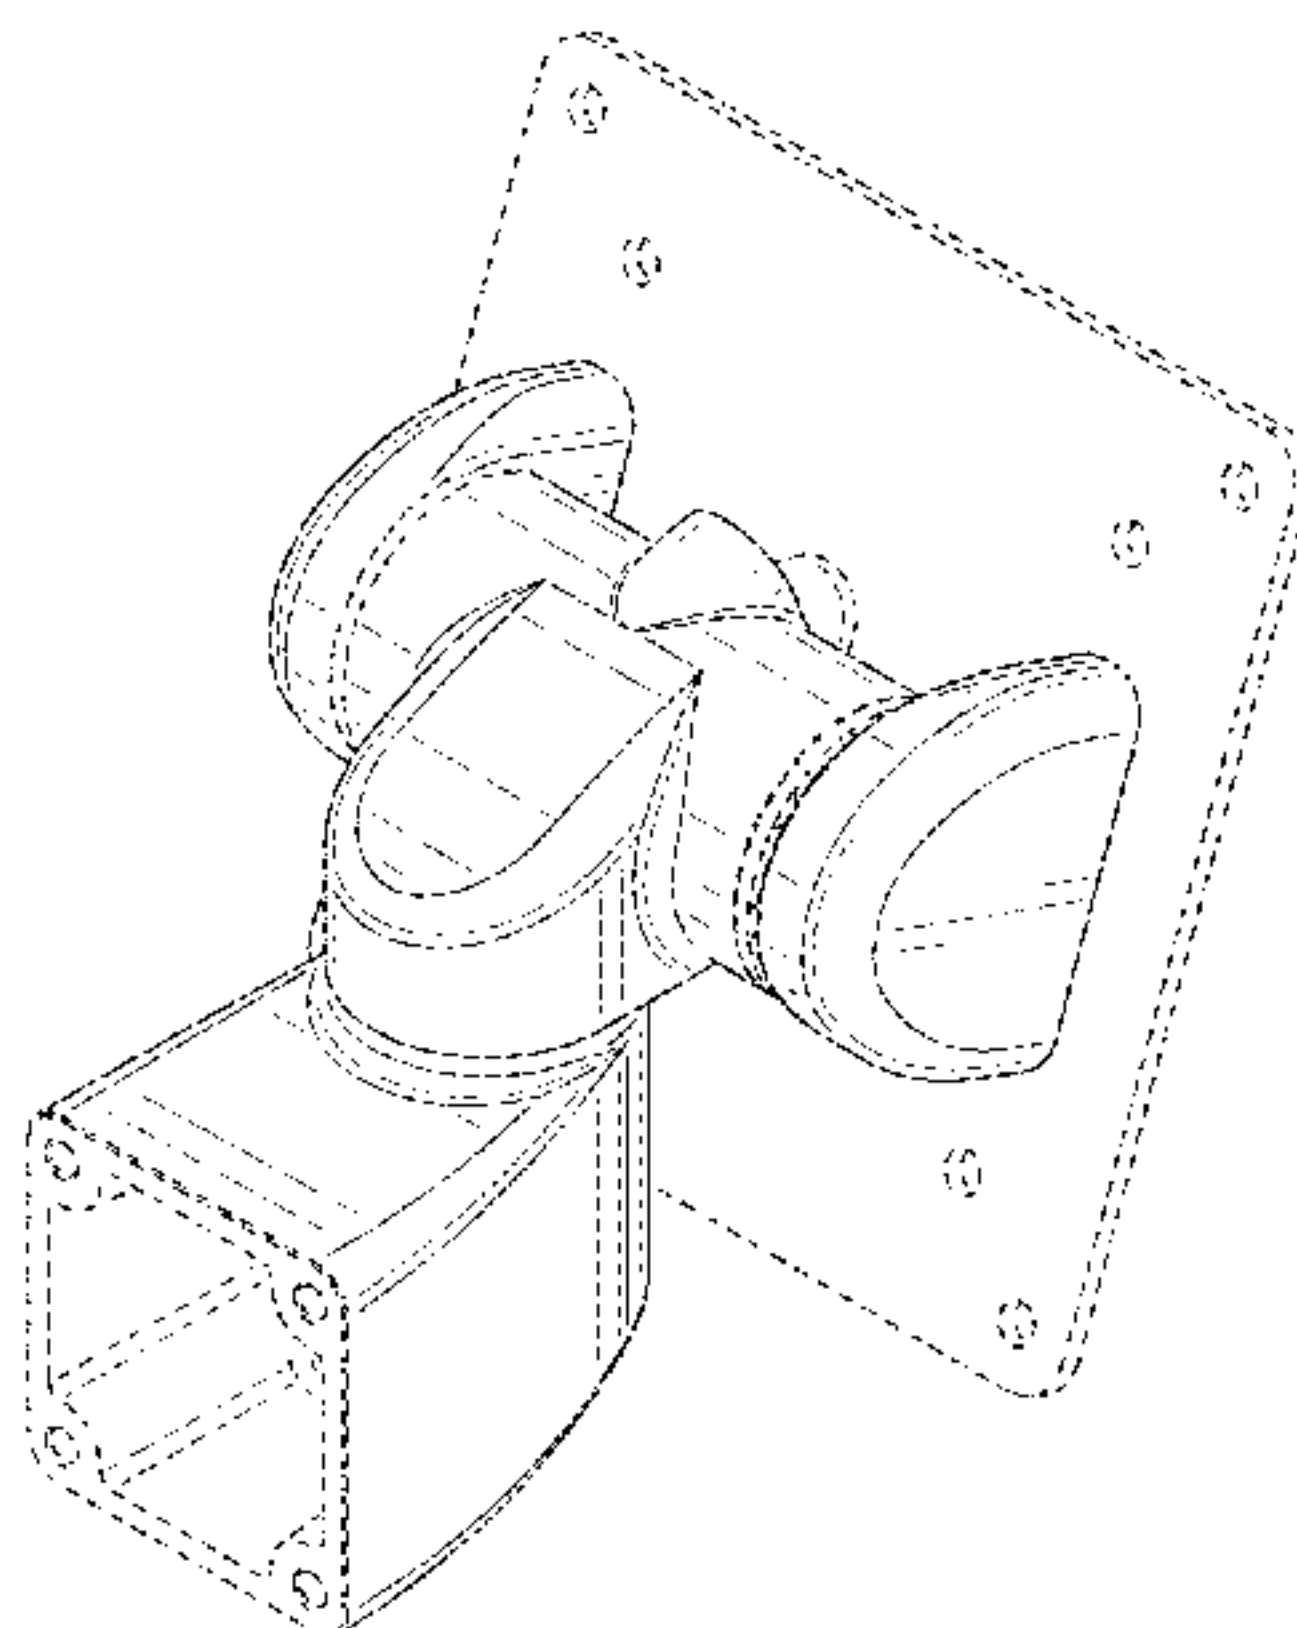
is a rear perspective view taken from the bottom left corner of the swivel mount of FIG. 1;
